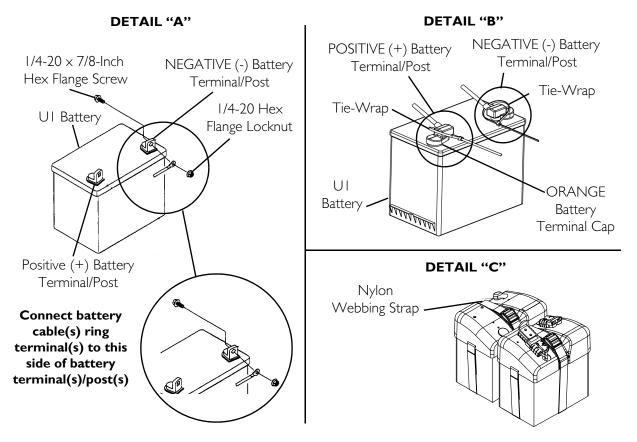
Connecting/Disconnecting Battery Cables - Wheelchairs Manufactured Before 7/14/03
